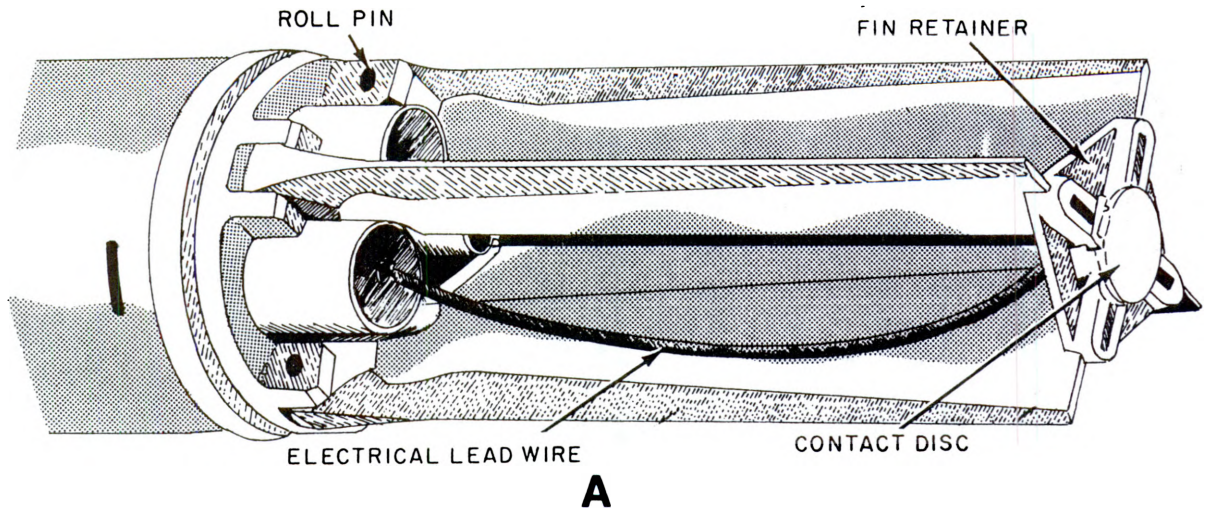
Typical center electrical lead wire connection (2.75-inch motor).
